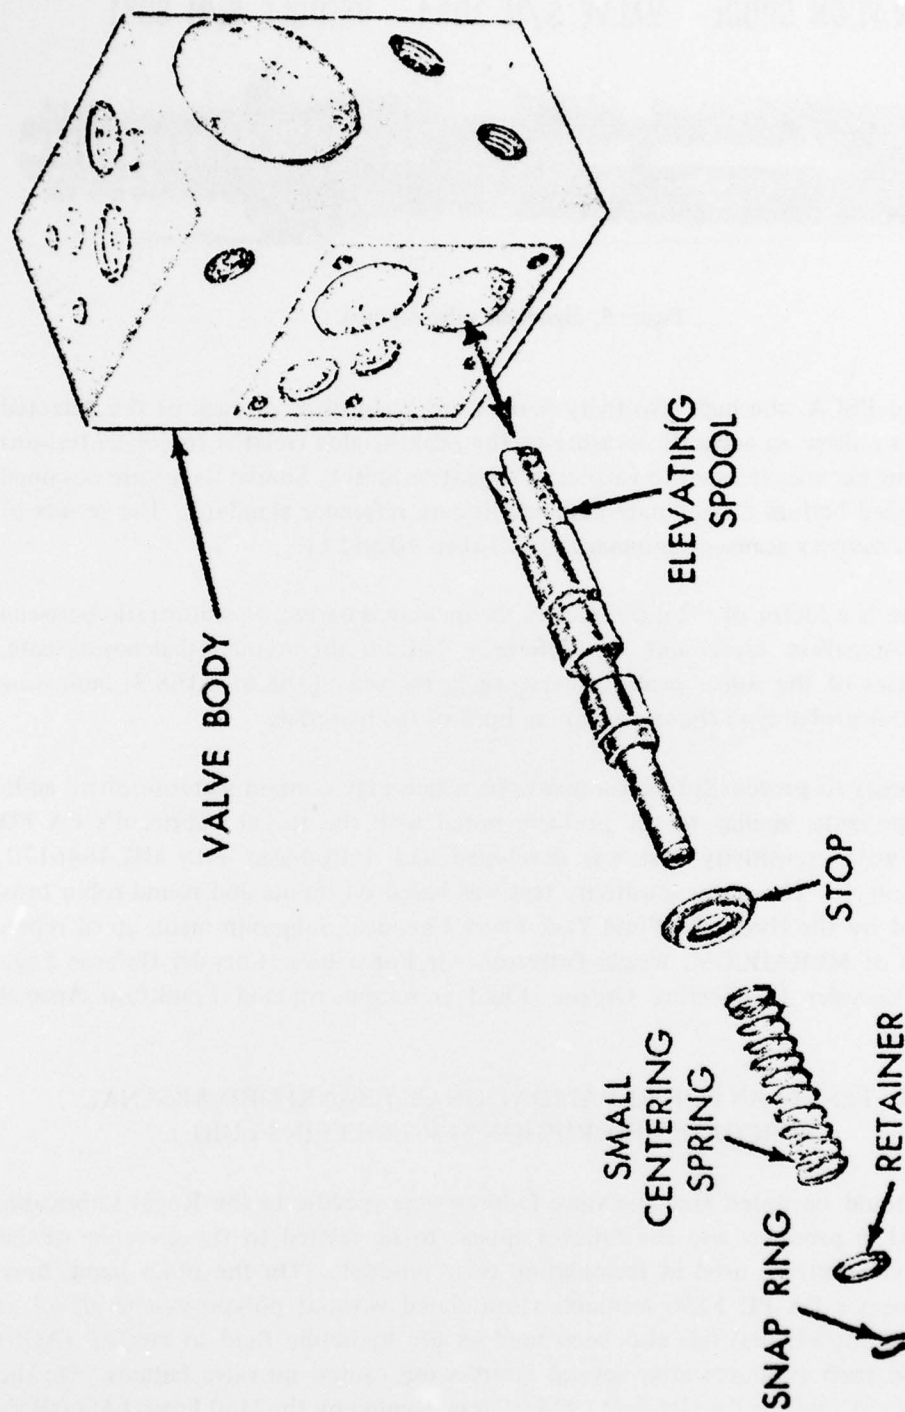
M60A1 gun and turret hydraulic system - elevating spool.
